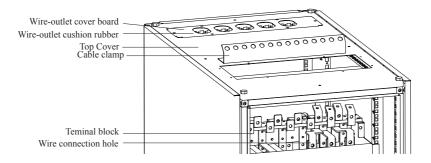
Wiring location of cabinet with upper wire-outlet holes (without the wire-outlet cover board besides the cable clamp)
